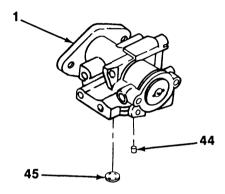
Body Channel Plug and Welch Plug Replacement.
